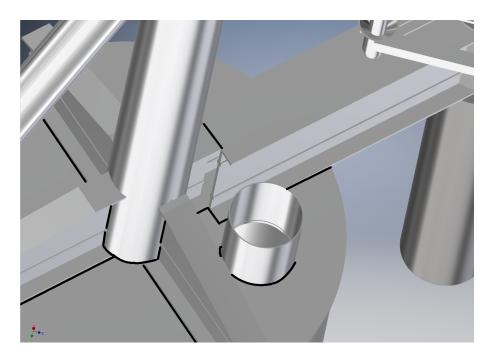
Weldments on suction anchor and beam 'i', dark lines are weldments.
